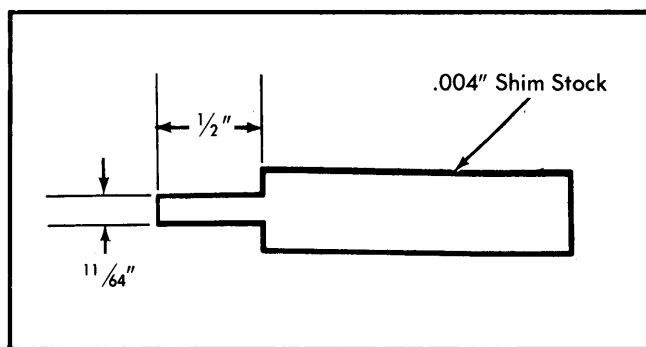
Rear Main Bearing Oil Seal Installation Tool
